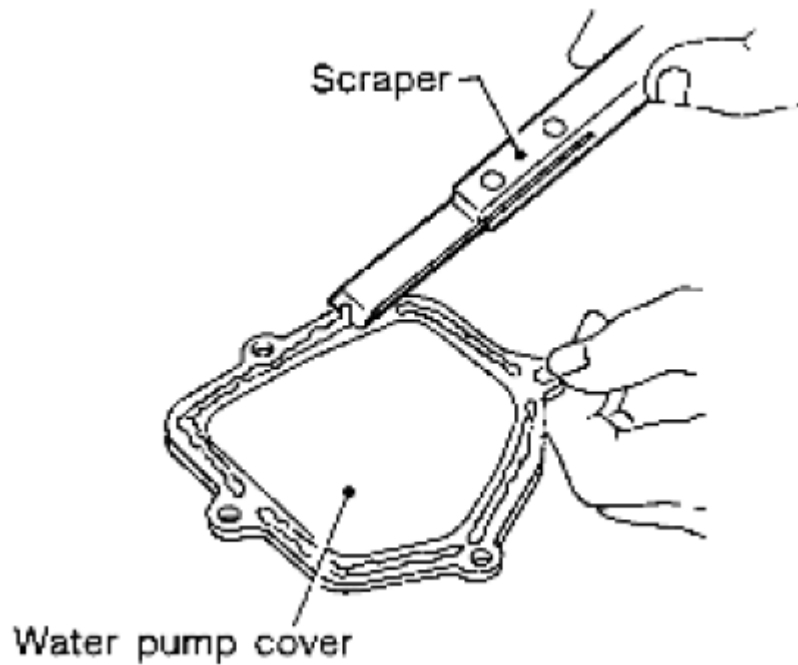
Removing Traces Of Liquid Gasket From Water Pump Cover
